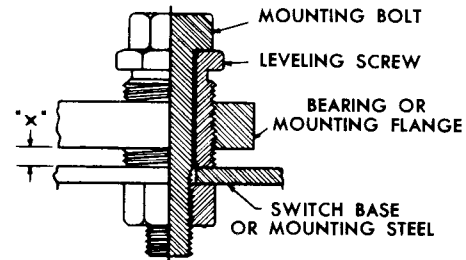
Leveling screw detail, 5-inch bolt circle.
